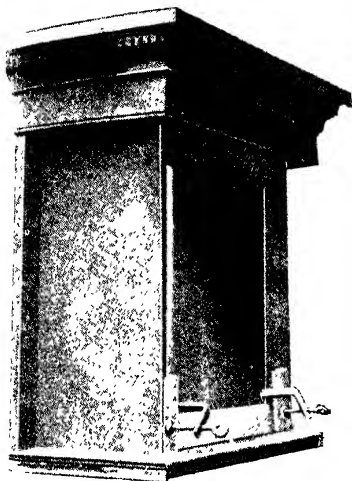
View of Clock Case Head Repaired but Unfinished
